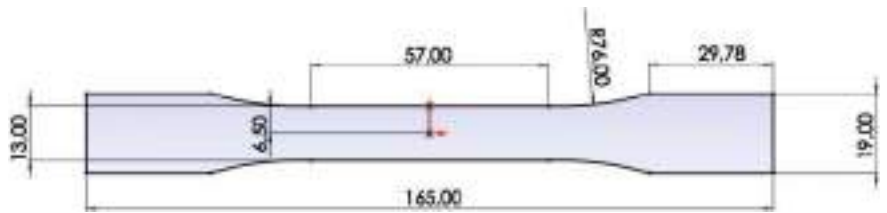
ASTM D638 specimen for tensile testing (mm)
